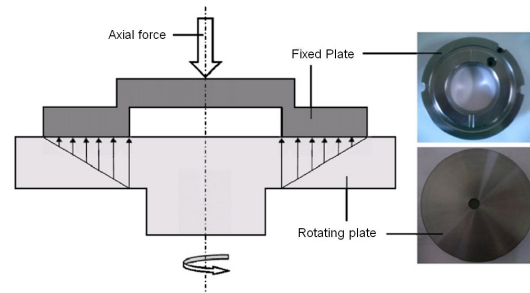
Simplified model of the fixed and rotating plates showing the axial force and the pressure distribution acting on the friction surfaces in the sliding thrust bearing of scroll compressors
